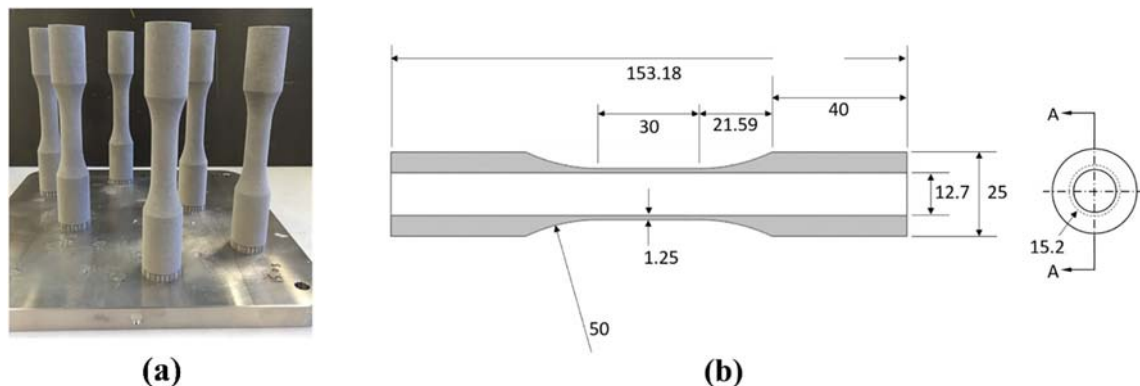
(a) As-built thin-walled tubular specimens vertically manufactured by laser-based PBF machine (Courtesy of Dr. Shamsaei), (b) Detailed specimen geometry after surface machining.
